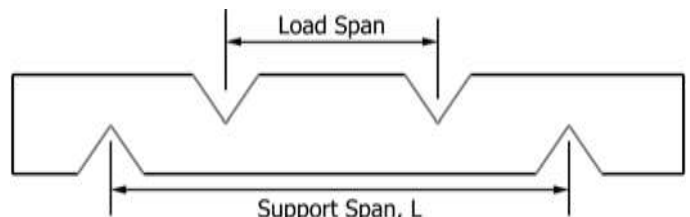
Fixture Used to Align Loading Noses and Supports
